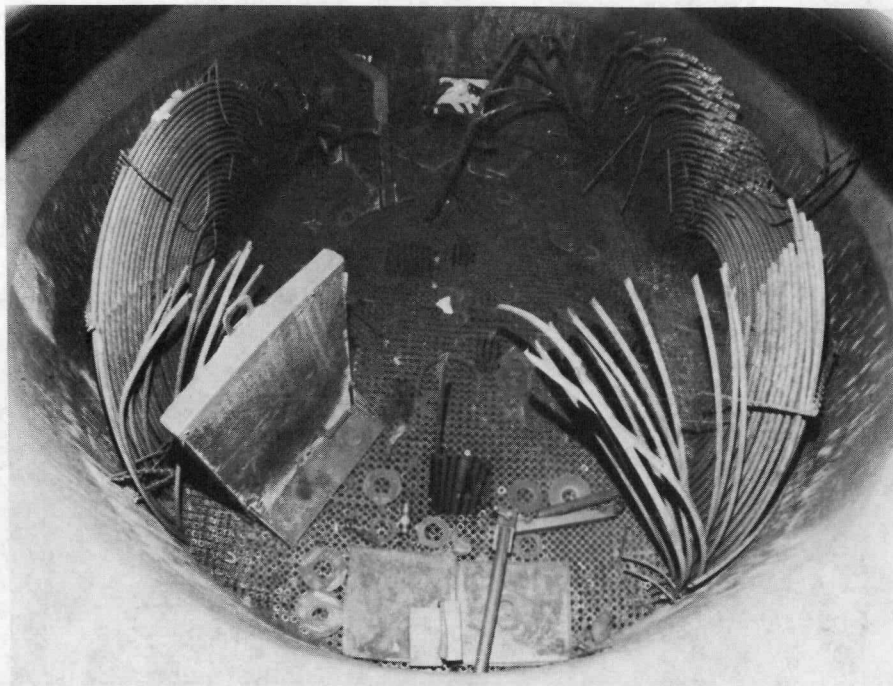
Top of Tube Bundle with U-bends Largely Removed
